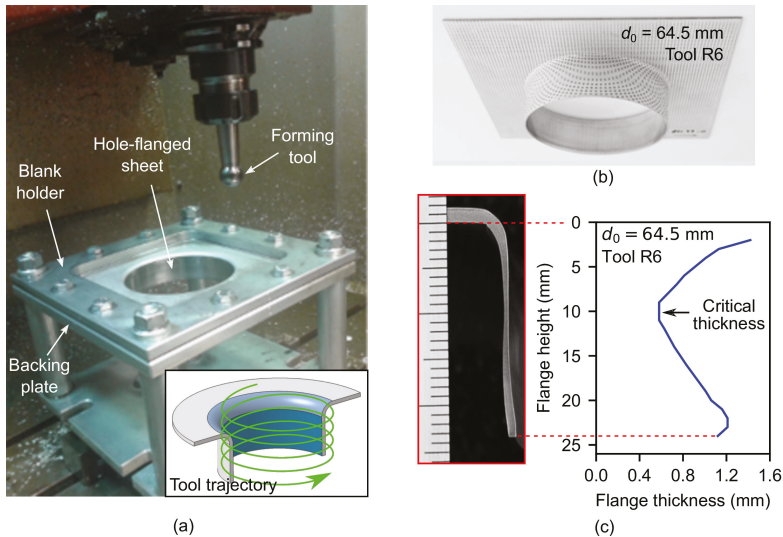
Hole-flanging by Single point incremental forming (SPIF) in a single stage of an AA7075-O sheet blank of 1.6-mm thickness: (a) experimental setup; (b) hole-flanged sheet part; and (c) thickness distribution along the flange.
